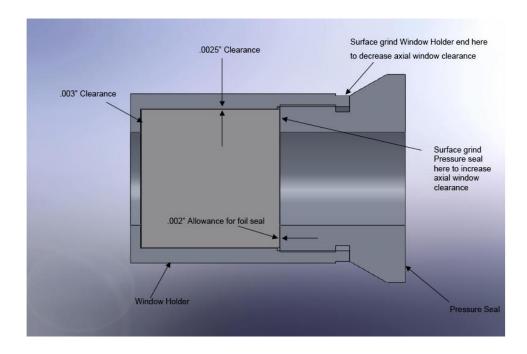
Window holder showing tolerances and machining requirements. A Kapton® film (T_{melt} > 300°C) seals between the window (light gray) and holder body, which makes a metal-to-metal seal with a seat in the viscometer body.
